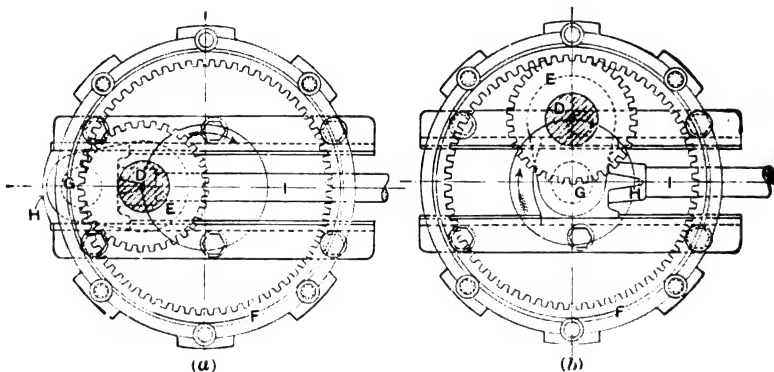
Pneumatic Coal Puncher. Diagram of Gearing.
